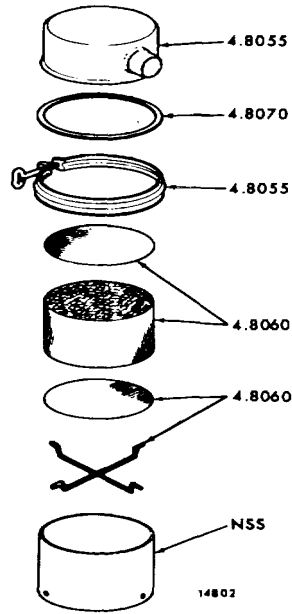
A BREATHER ASSEMBLY (Stamped Cover)
